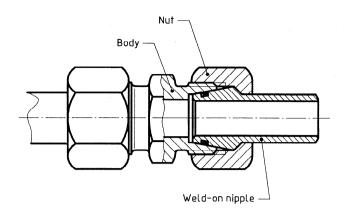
Cross-section of typical 24° cone connector with O-ring weld-on nipple
